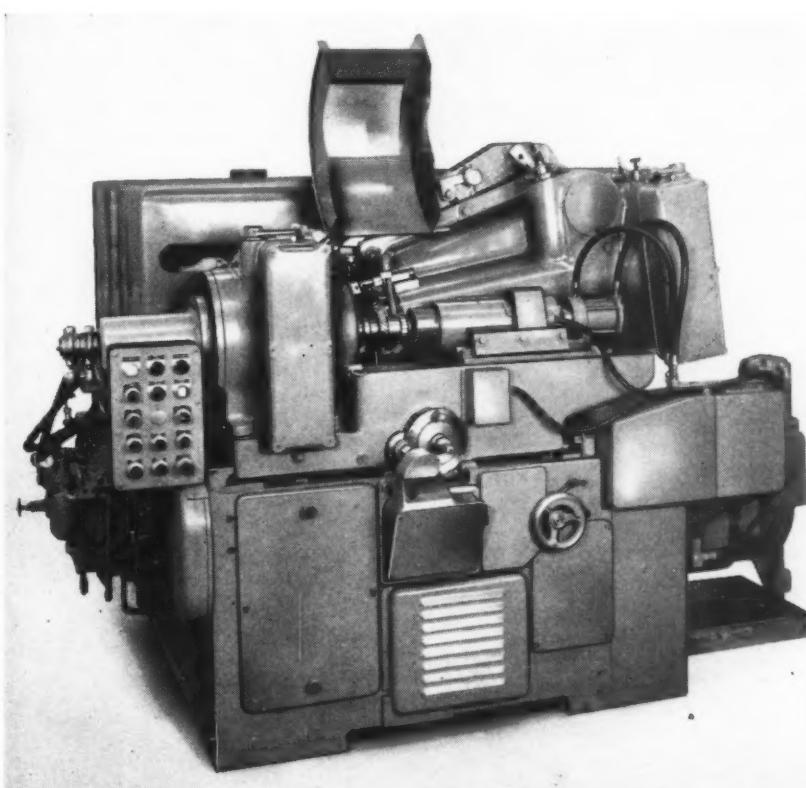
Front view of Fellows No. 12 gear finisher for external spur and helical gears, employing a new type of cutter
